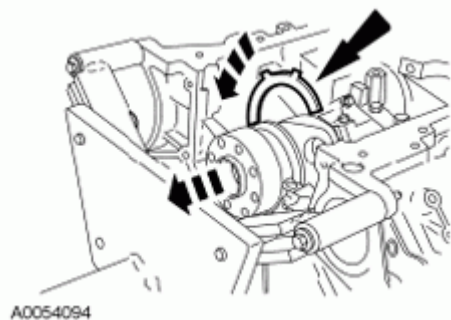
Installing Rear Crankshaft Upper Thrust Washer
